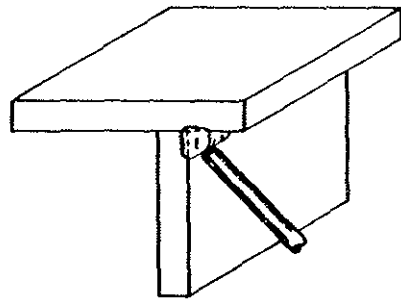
Single Pass 5/16" Fillet Weld
